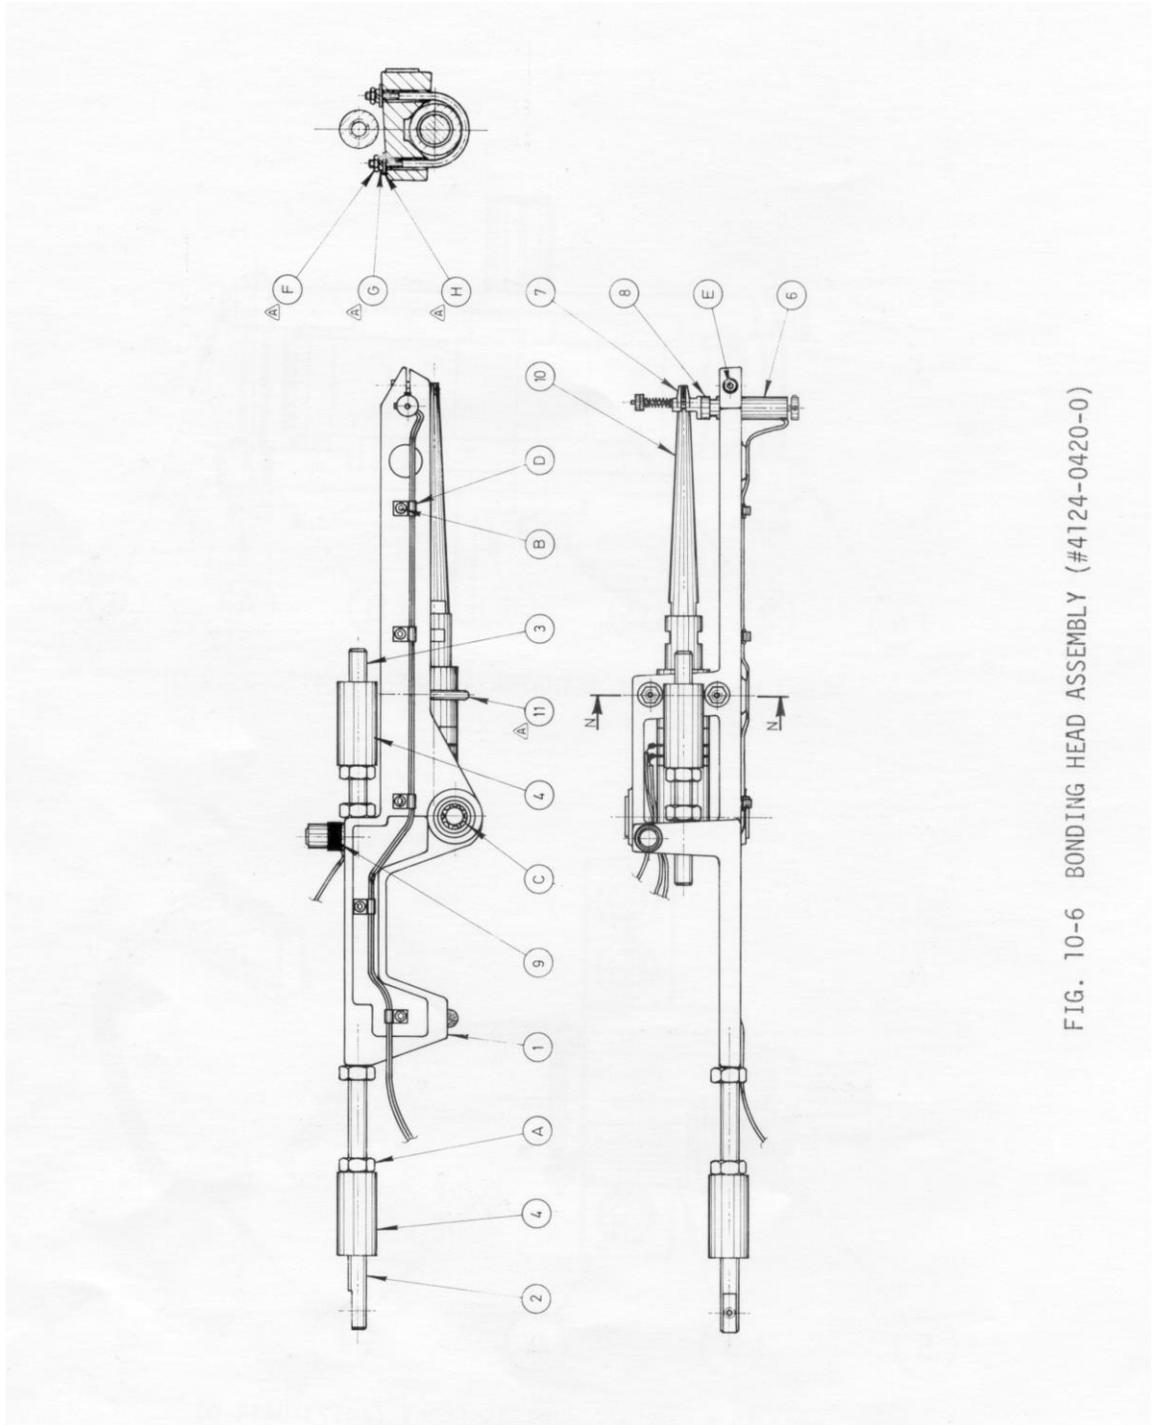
BONDING HEAD ASSEMBLY (#4124-0420-0)
